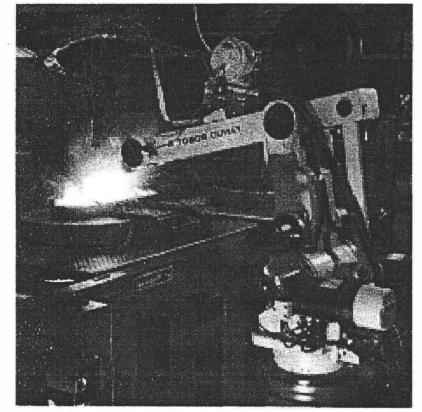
A FANUC Industrial Robot is Performing Welding on a Part which is Locked into the Pallet in Transfer Line (Mckerrow, 1991)
